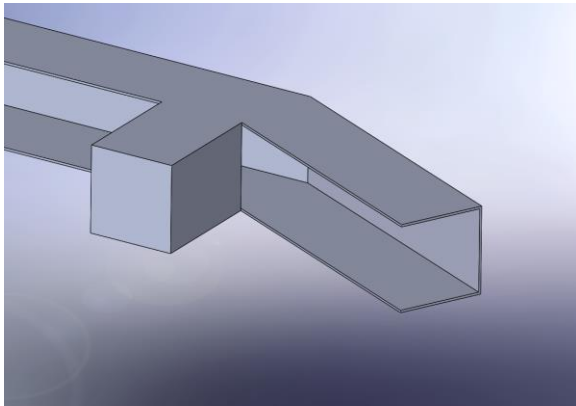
(f) Side View of C Sectioned Bumper Beam
